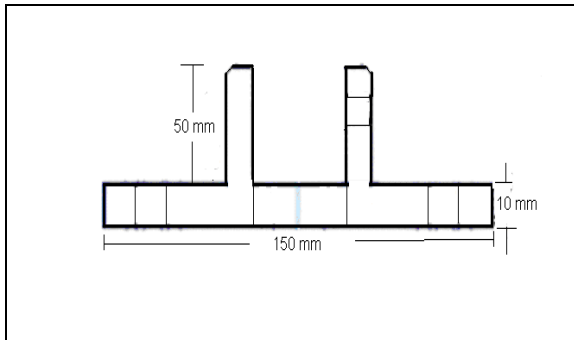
Showing the drawing of component C which supports the antenna holder
